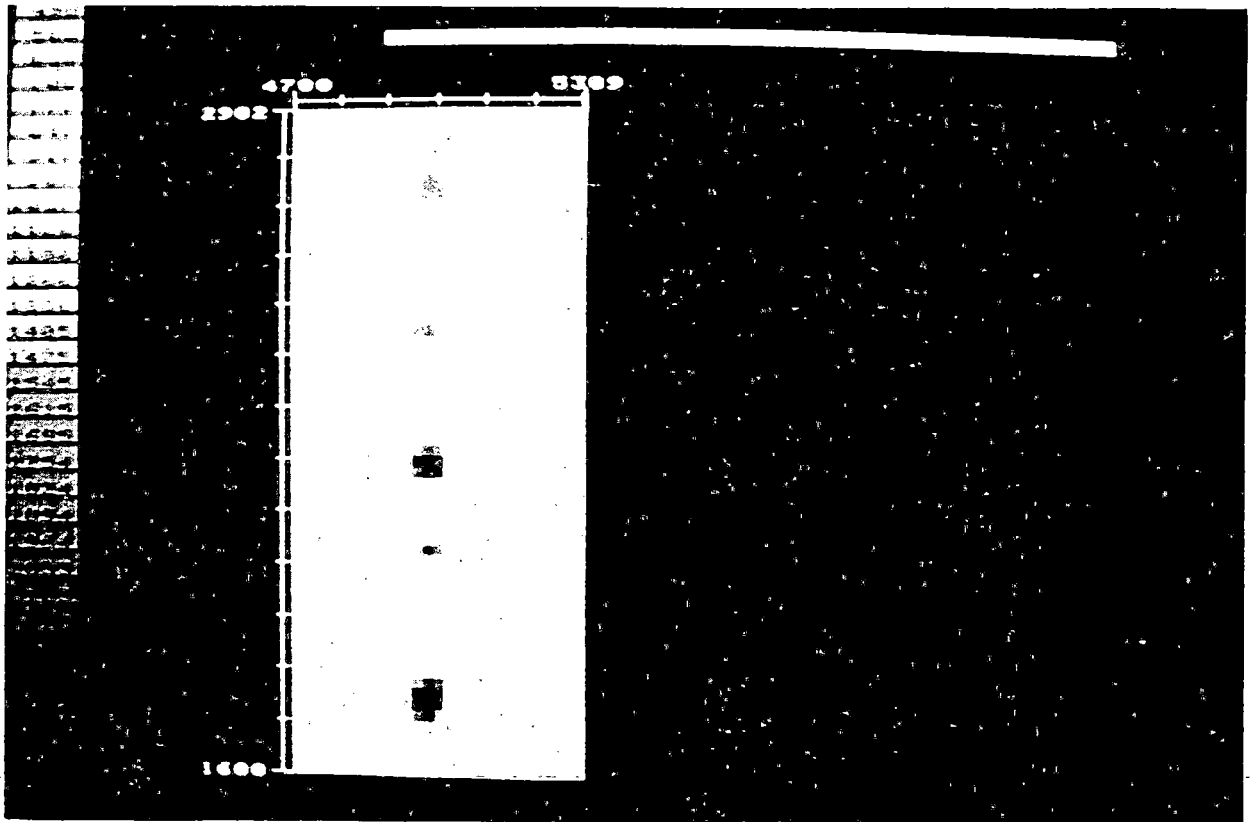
CYLINDRICAL WROUGHT STAINLESS STEEL SPECIMEN, C-SCAN VIEW OF AXIALLY ORIENTED HOLES
